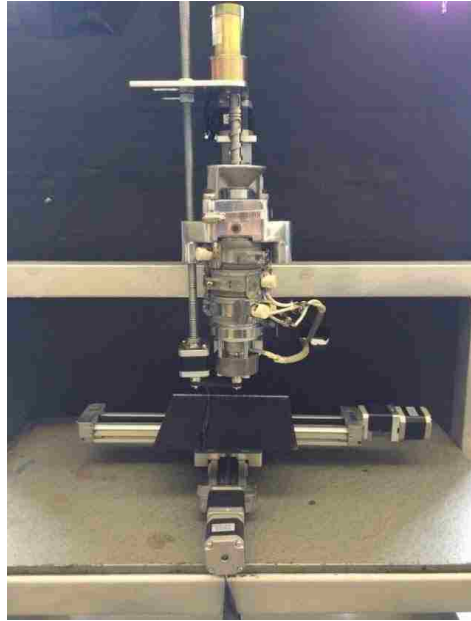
Initial prototype 1 manufactured at Lehigh University.
